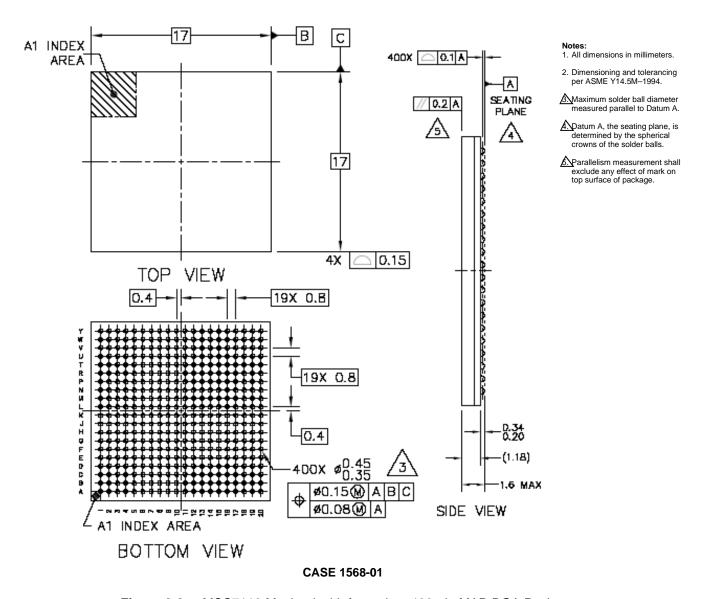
MSC7116 Mechanical Information, 400-pin MAP-BGA Package
